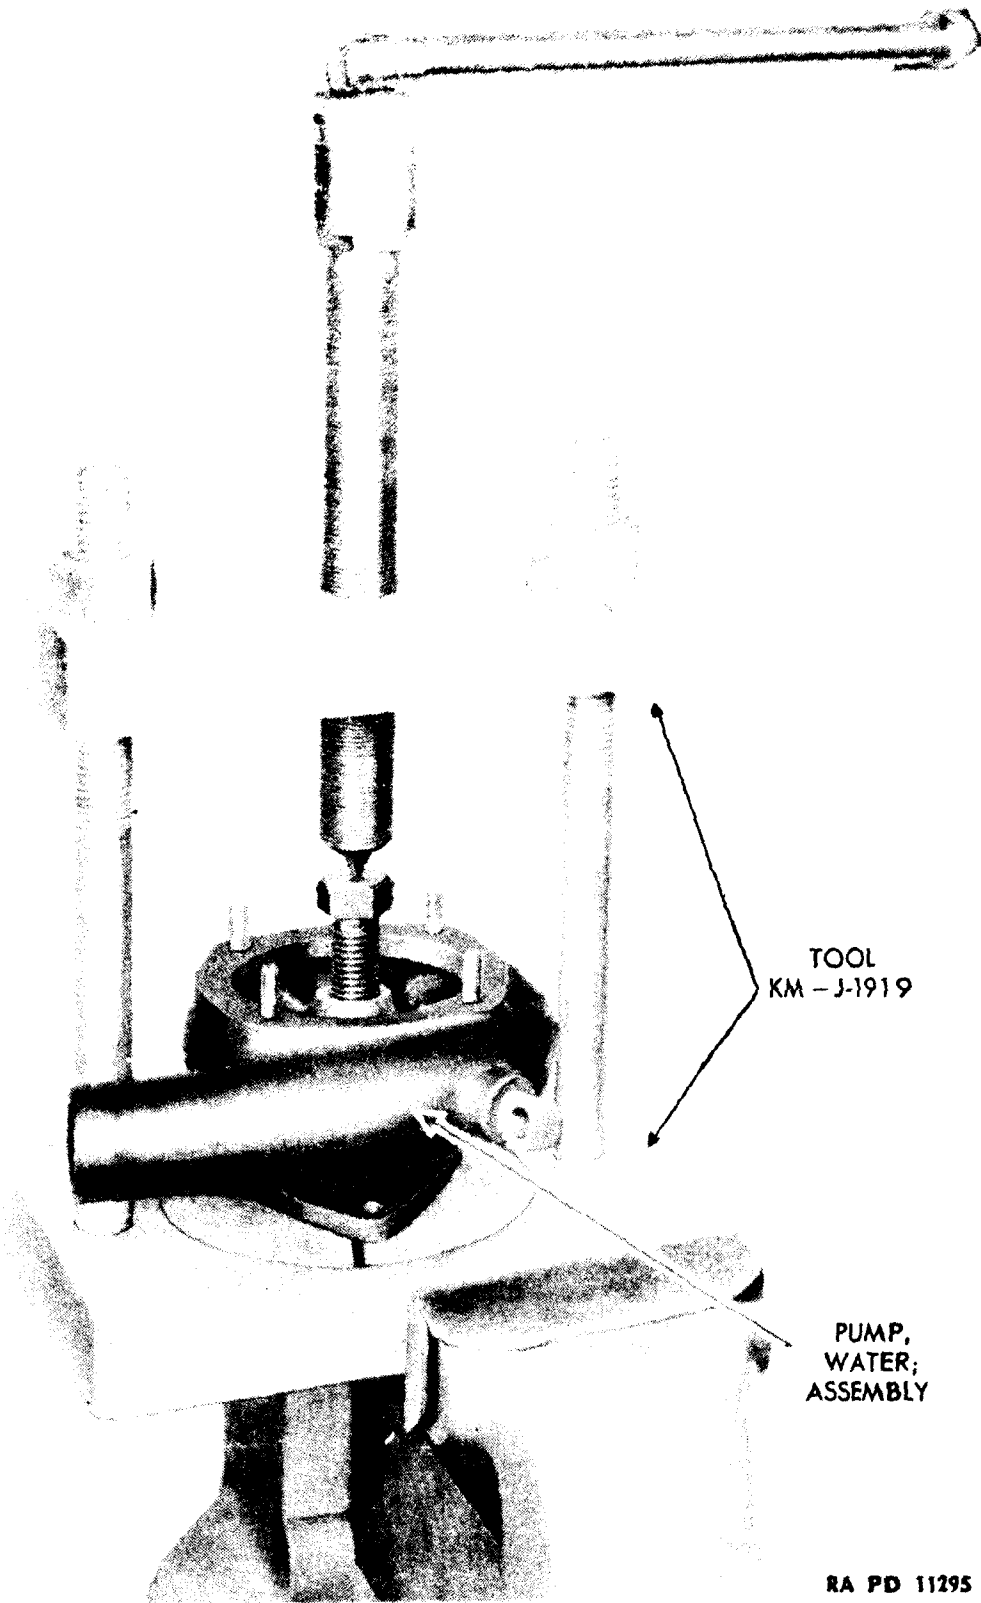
Removing Water Pump Shaft and Bearing Assembly
